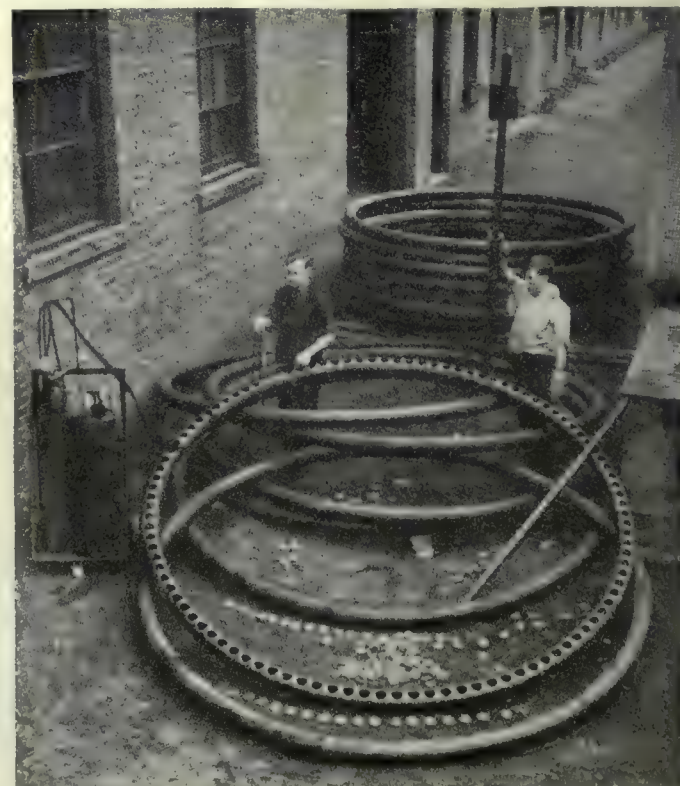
USING CIRCULAR CUTTING TORCH FOR MAKING TUBE HOLES IN HEADER.
